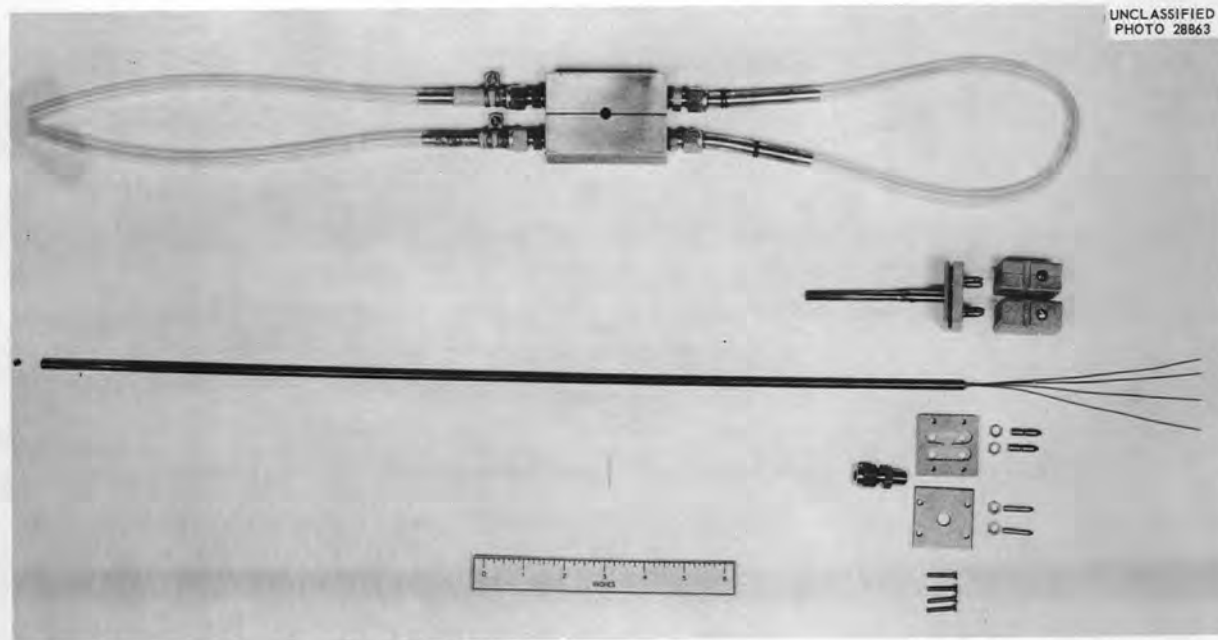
Thermocouple Test Sample Made of 0.250-in.-OD Inconel-Sheathed Material. Shows assembled and disassembled connectors, water-cooled copper chill-block for junction fabrication, and Inconel filler tip.
